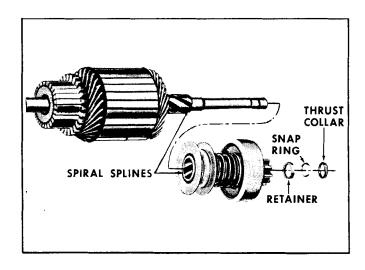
E-7 Armature and Overrunning Clutch Assembly
